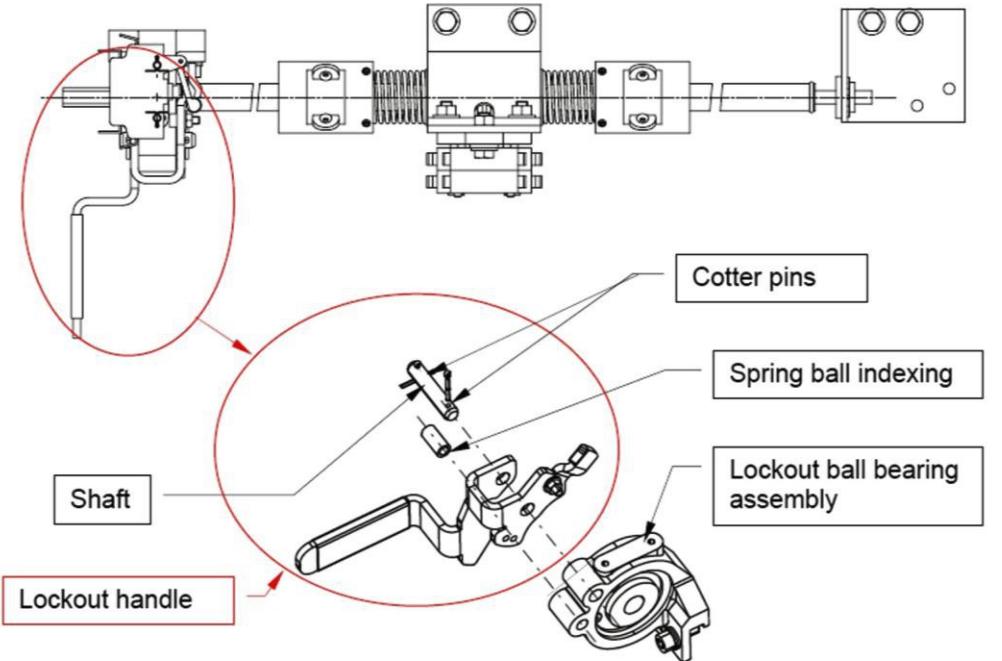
LOCK-OUT DEVICE SCREW REMOVAL/INSTALLATION
